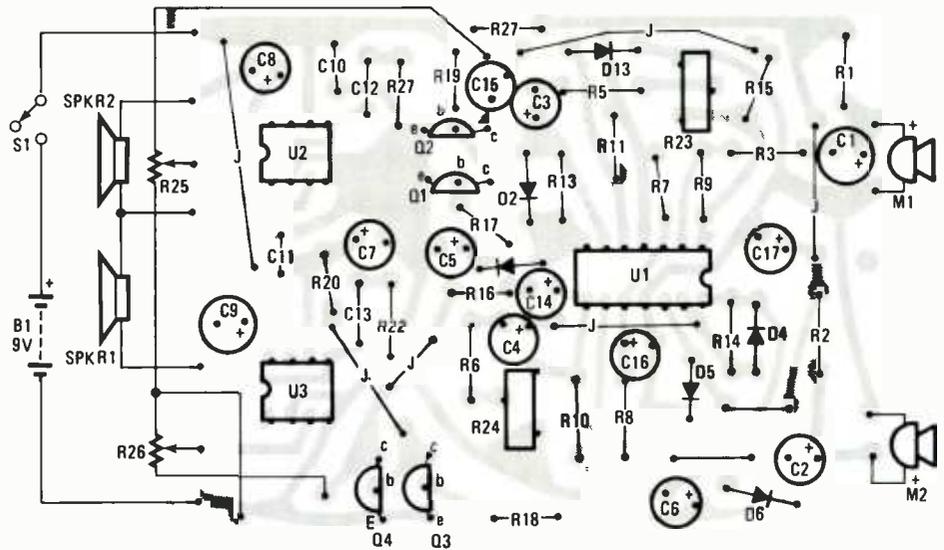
When wiring the off-board components remember that speakers one and two are connected through stereo jacks. Remember that R25 and R26 are two parts of a stereo pot.
